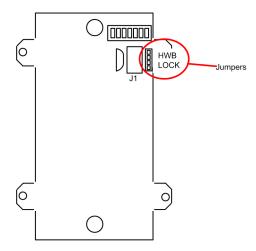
Jumper positions on VTAP100 PCB v4a or v5 hardware
